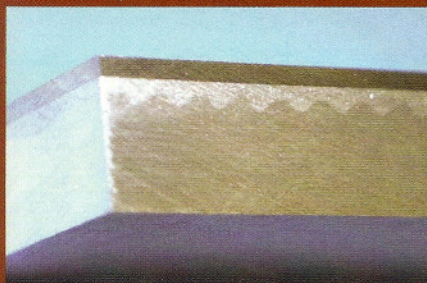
The characteristic wavy explosive weld appearance is clearly visible in this cross section.
